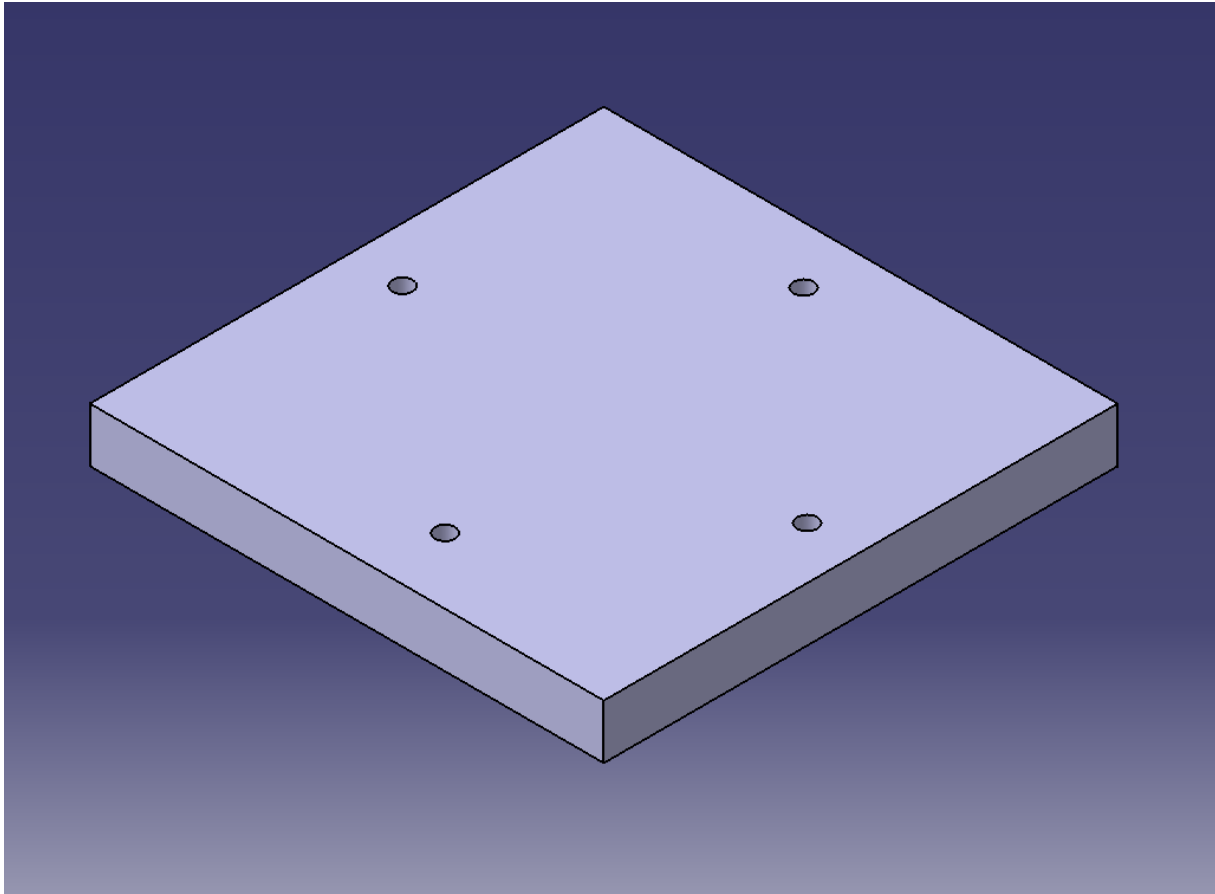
Mounting Plate Attaching to Tank Truss CAD Model
